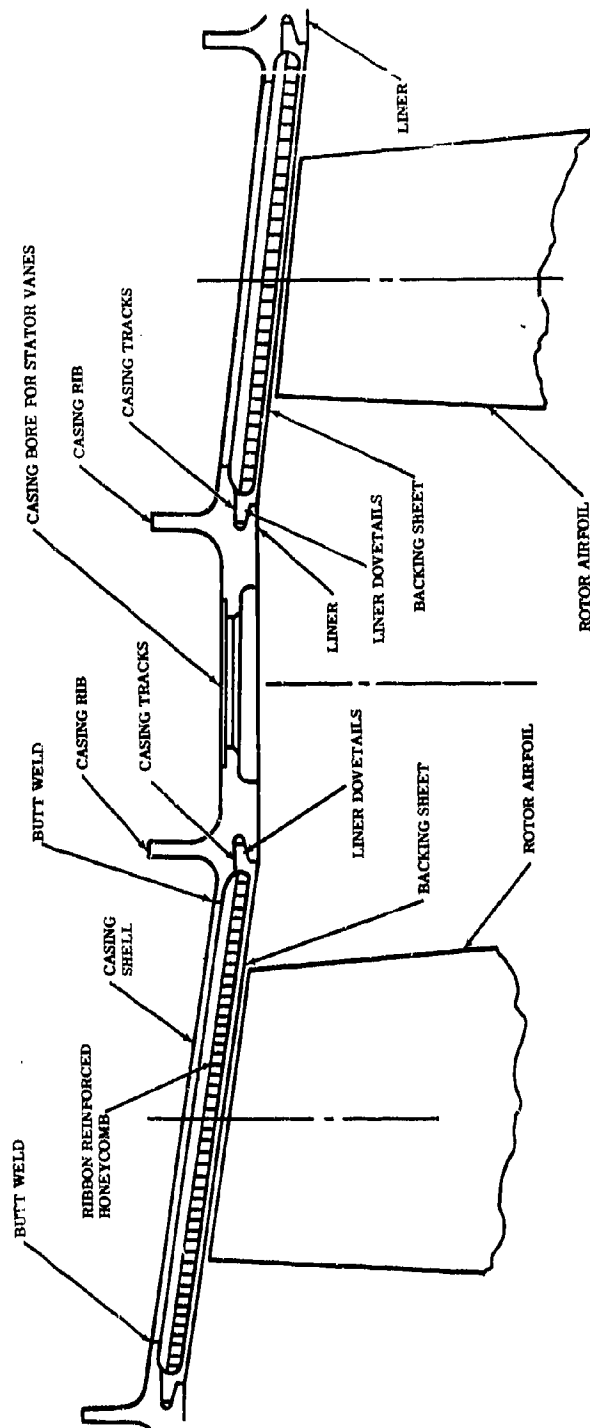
LINER CONFIGURATION AND ATTACHMENT TO STATOR CASING. Liner Configuration and Attachment to Stator Casing Stages 4 through 9 Fabricated Casing Cross-Section Delineation
